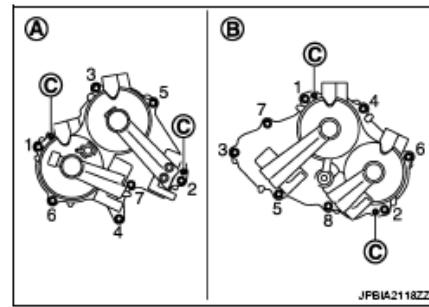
Identifying Dowel Pins On Front Cover With Dowel Pin Holes
